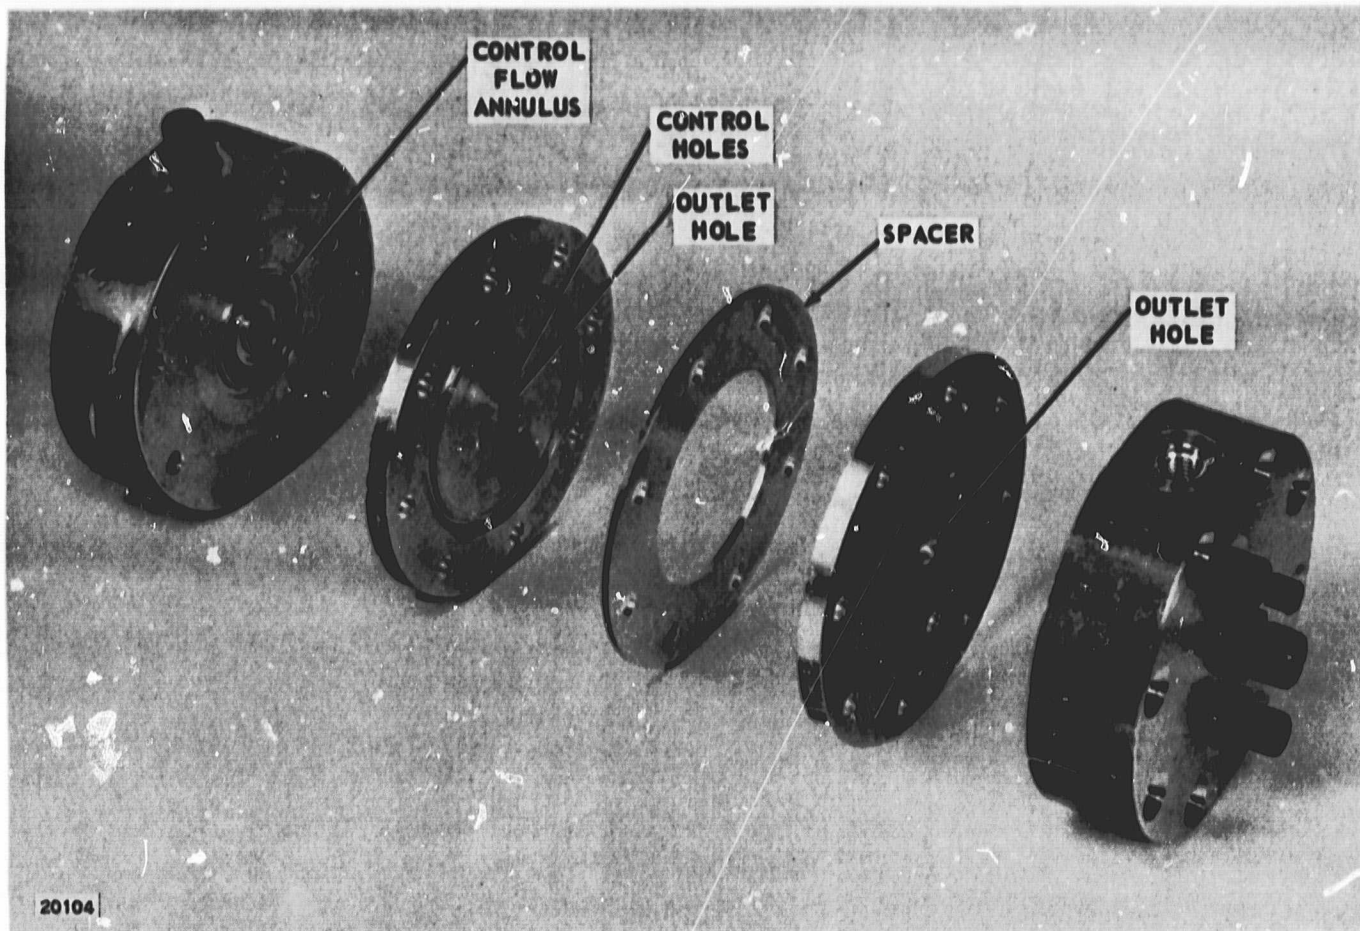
Radial Inlet - Double Outlet Vortex Valve
